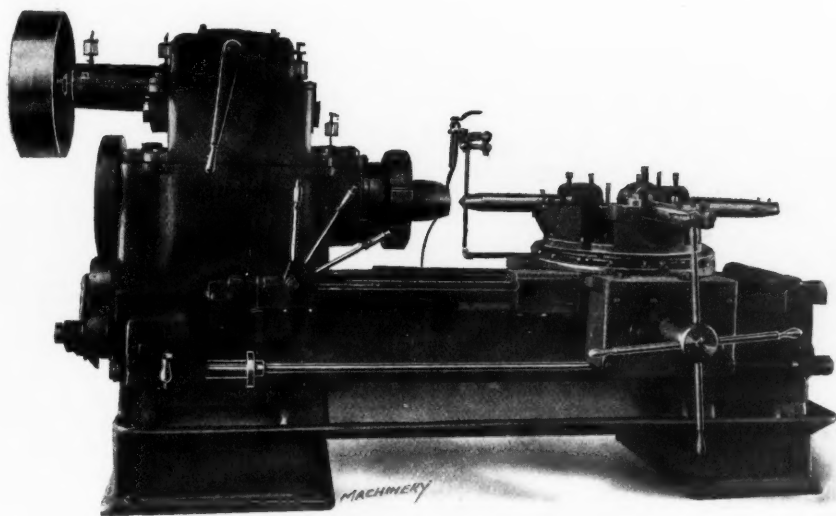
Dodge Turret Lathe for machining Shells up to 6 Inches in Diameter
